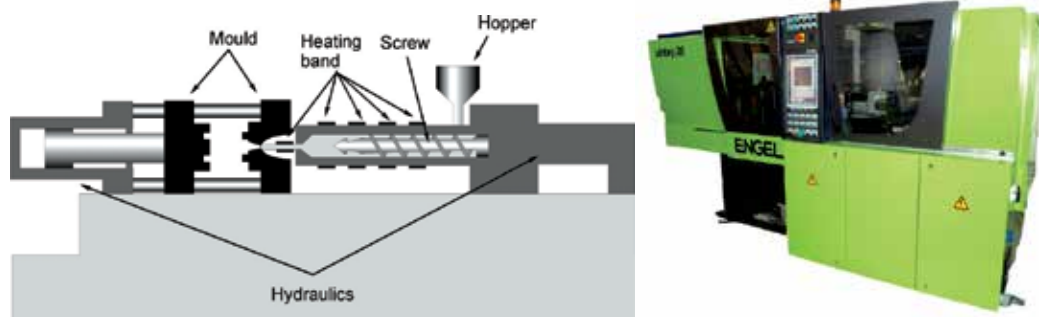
Left, cartoon of an injection moulding machine illustrating key components. Right, photo of an industrial injection moulding machine.
